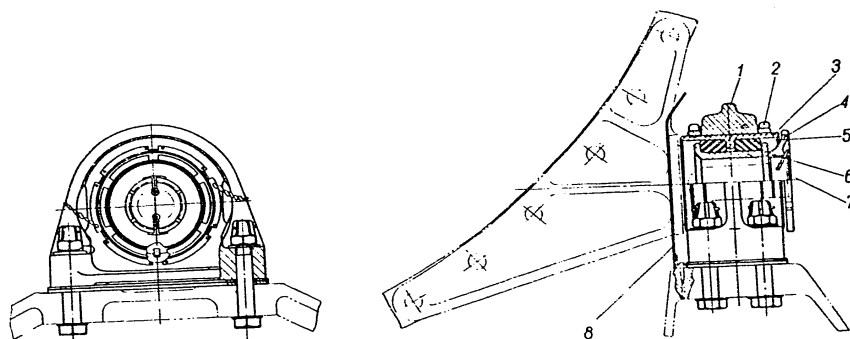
BRACKET FOR OUTSIDE ENGINE ATTACHMENT IN REAR ZONE
